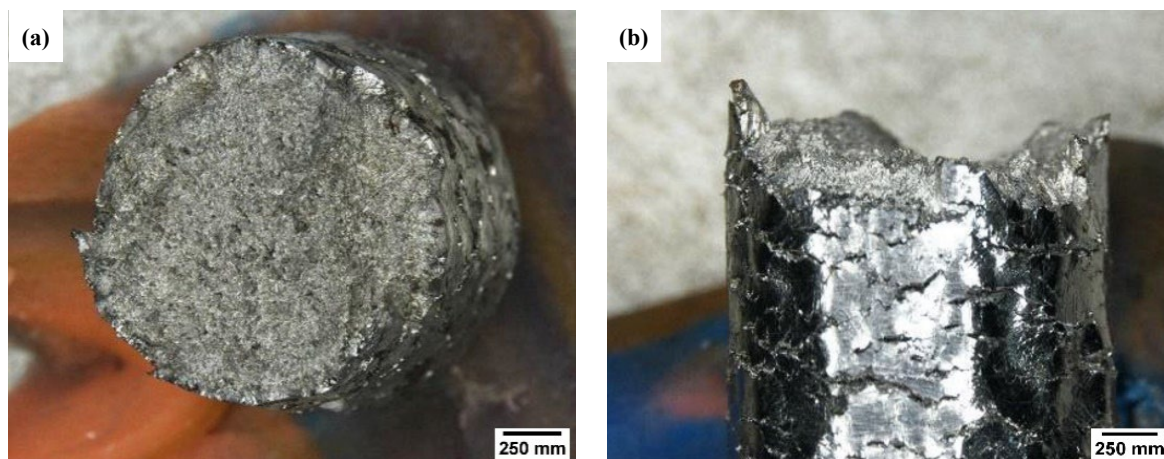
Fracture of the tensile test specimen. (a) top view, (b) side view.
